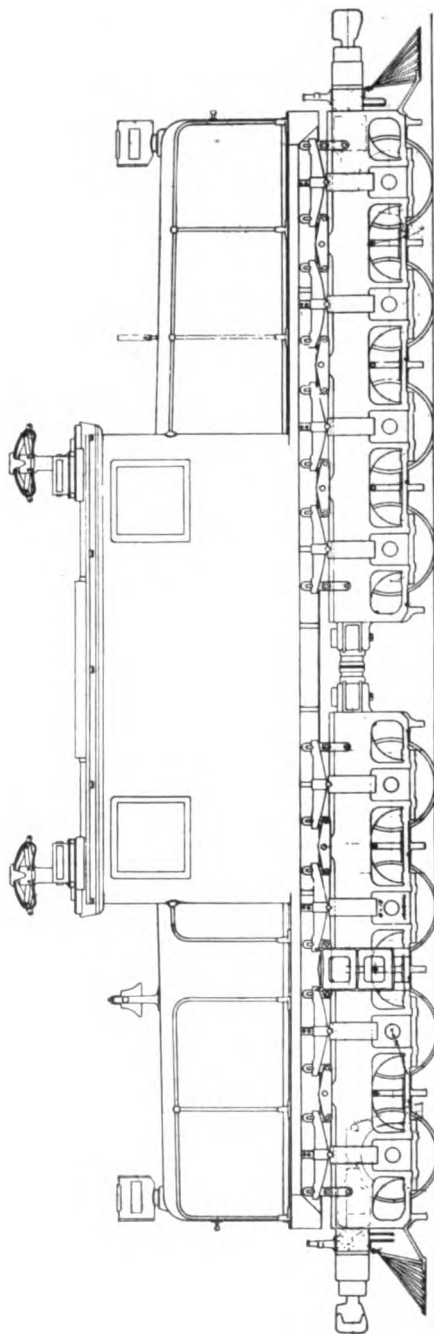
1800 h.p., 1500-volt bogie truck locomotive, gearless motors Weight, 126 tons.
